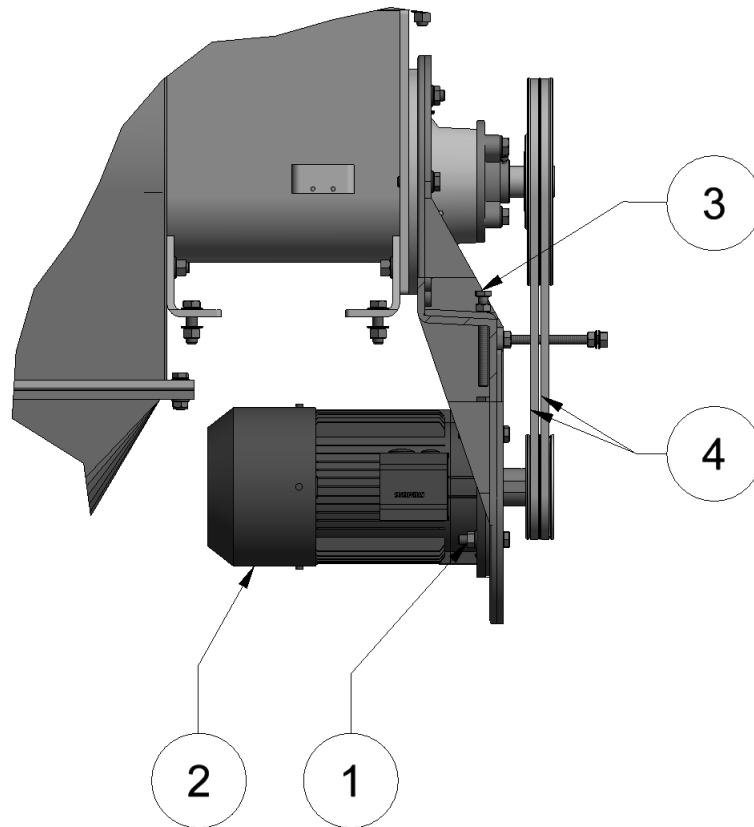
Bearing housing (drive side): Remove V-belt
